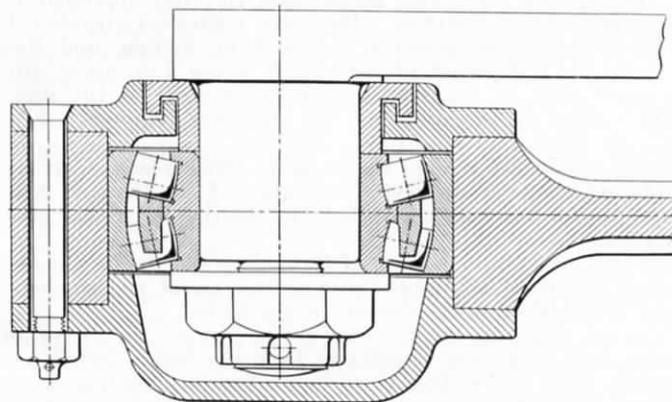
ROLLER-BEARING RETURN CRANK.
